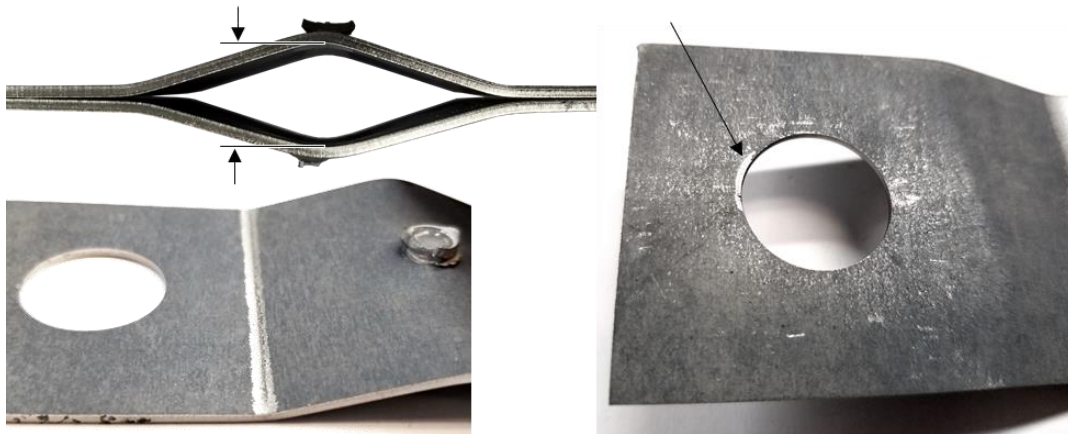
Top Left) Coupon deformation showing vertical displacement measurement. Bottom Left) Al-Si coating missing where the coupon is pulled out of the clamping fixture. Right) Al-Si coating flakes off due to coupon contact with the clamping bolt.
